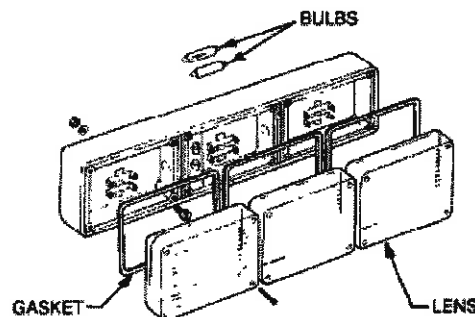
Stop/Tail, Reversing and Indicator Lights - Exploded View
